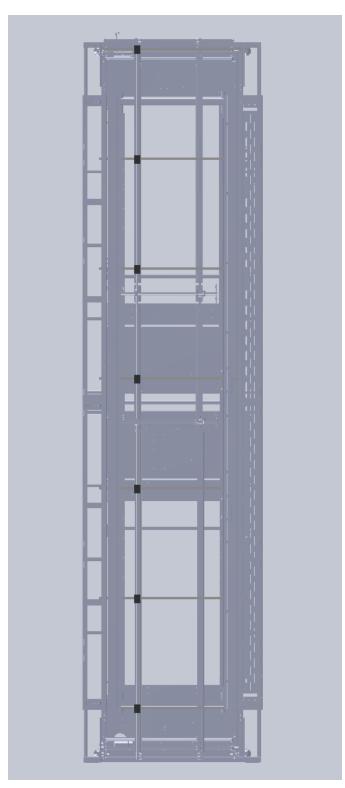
Top view of rack and pinion modules in oven. Black rectangles represent locations of pinion housings. Shaft runs between pinion housings.
